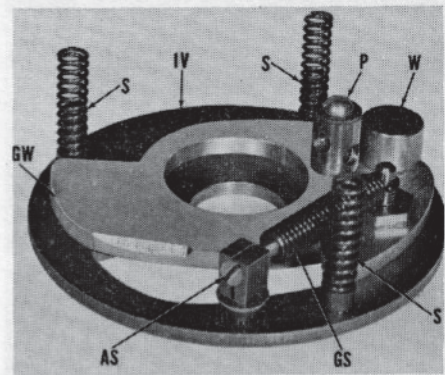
View of late production rotary inlet valve and governor assembly. Early production units did not have adjusting screw (AS) and engine governed speed was non-adjustable.
